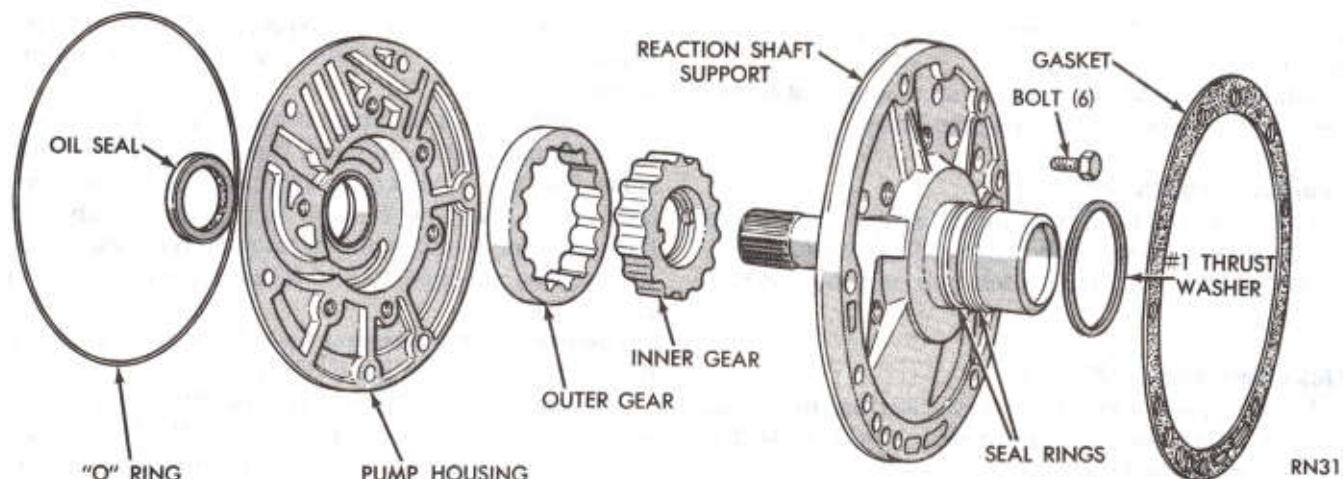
Oil Pump and Reaction Shaft Support (A-904T and A-999)
